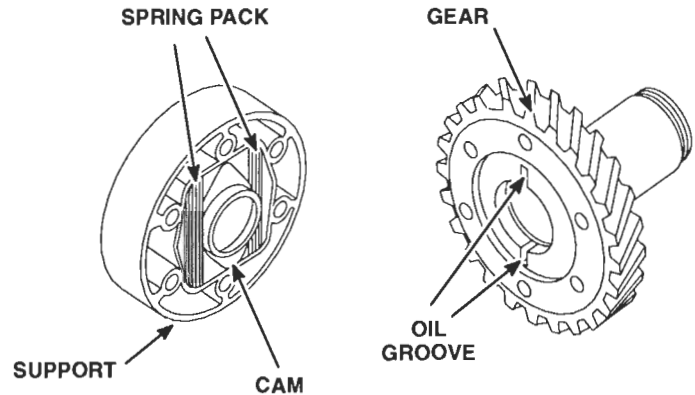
Relation of Blower Drive Cam to Oil Grooves in Gear Hub
